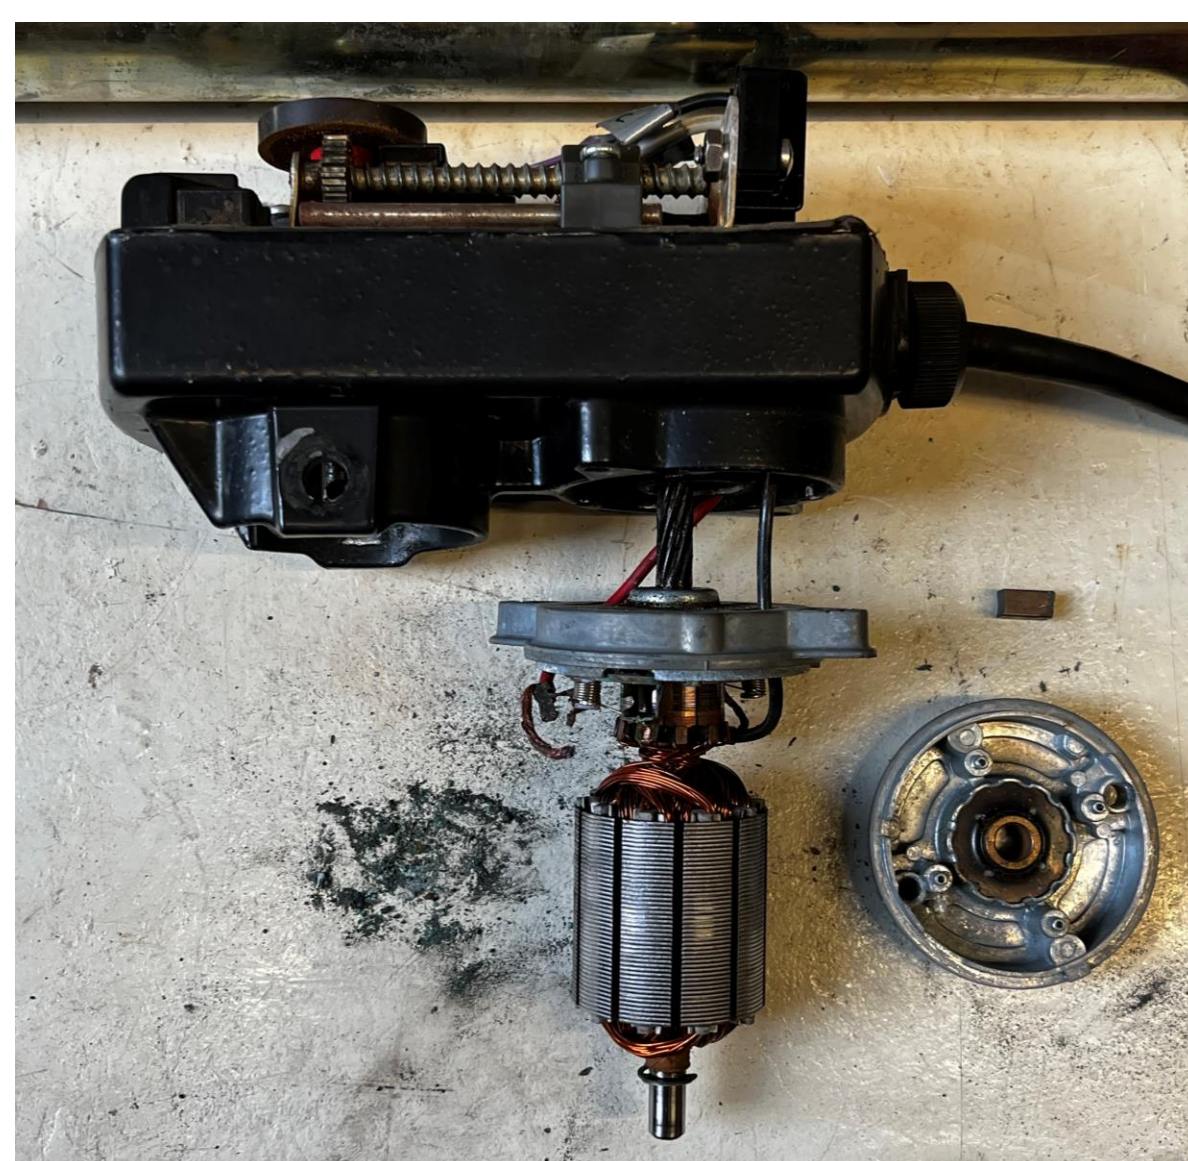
Disassembled Linear Actuator Motor and Electronics Housing
